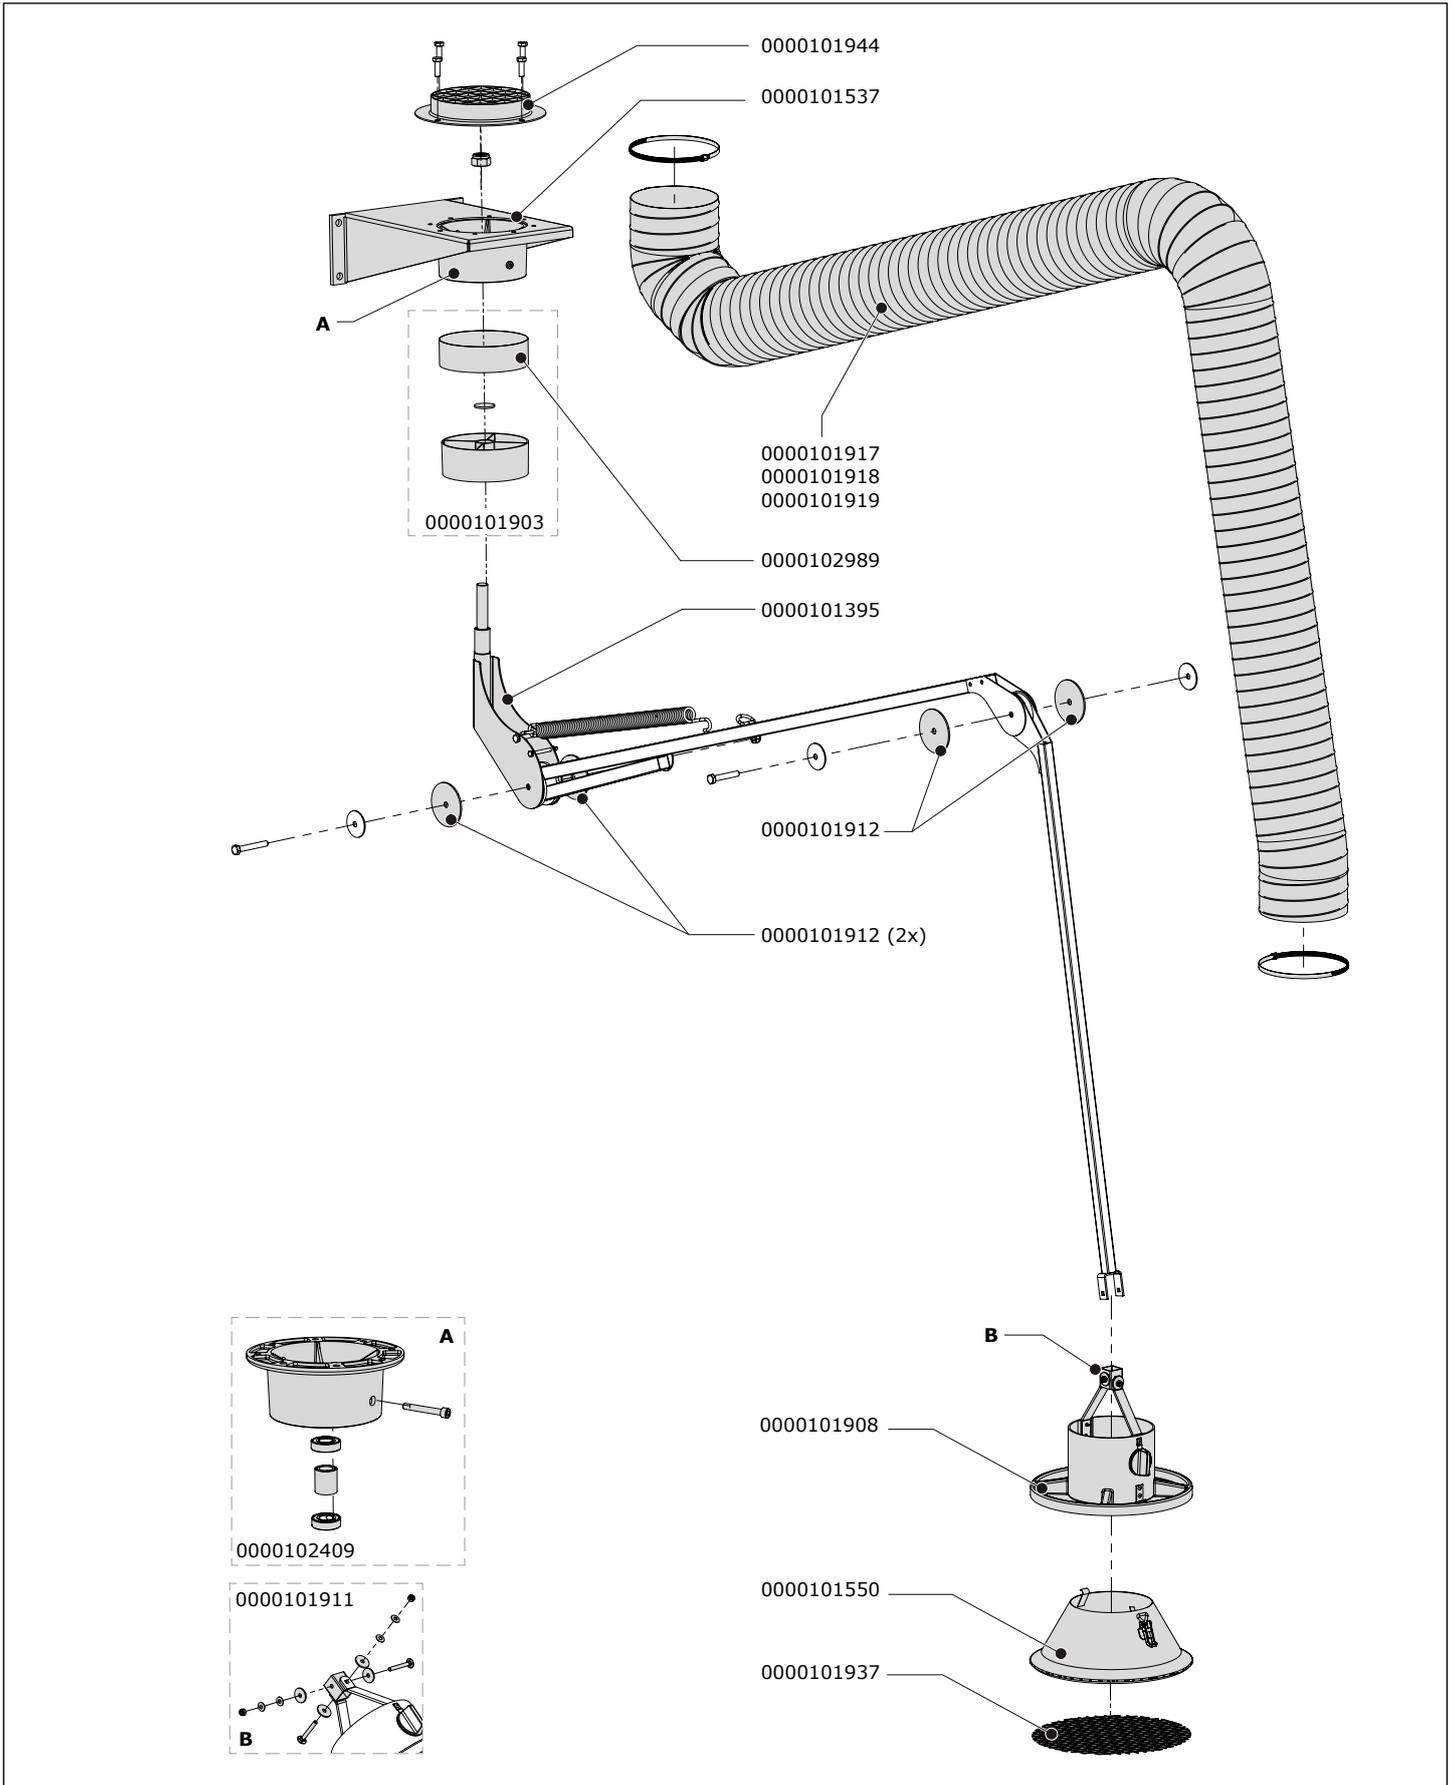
Fig. VI Exploded view MobileGo | MobileGo^{plus}
